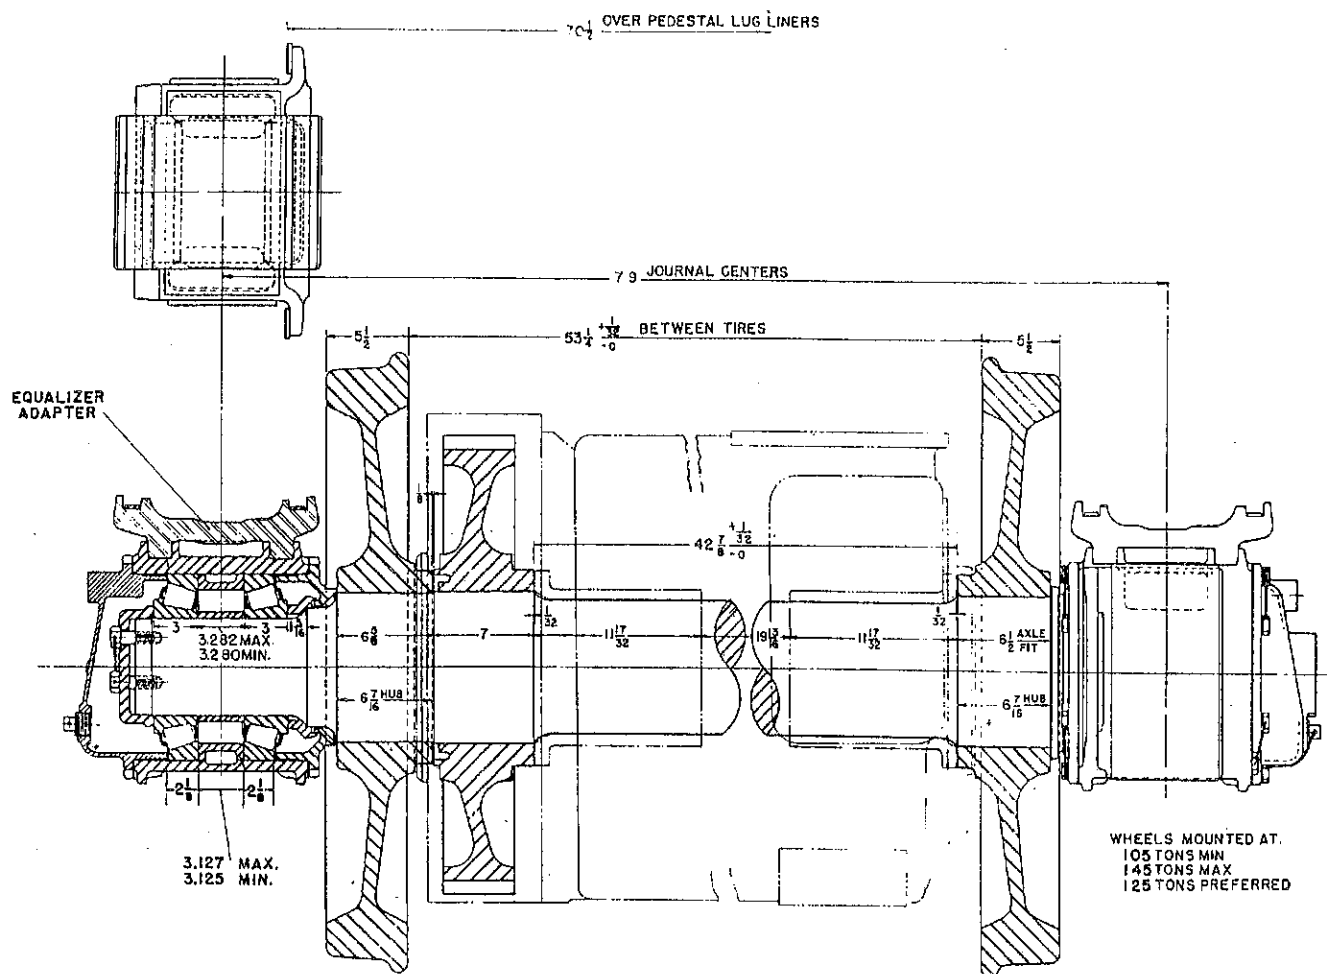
WHEEL, AXLE AND BOX ASSEMBLY WITH ROLLER BEARINGS
